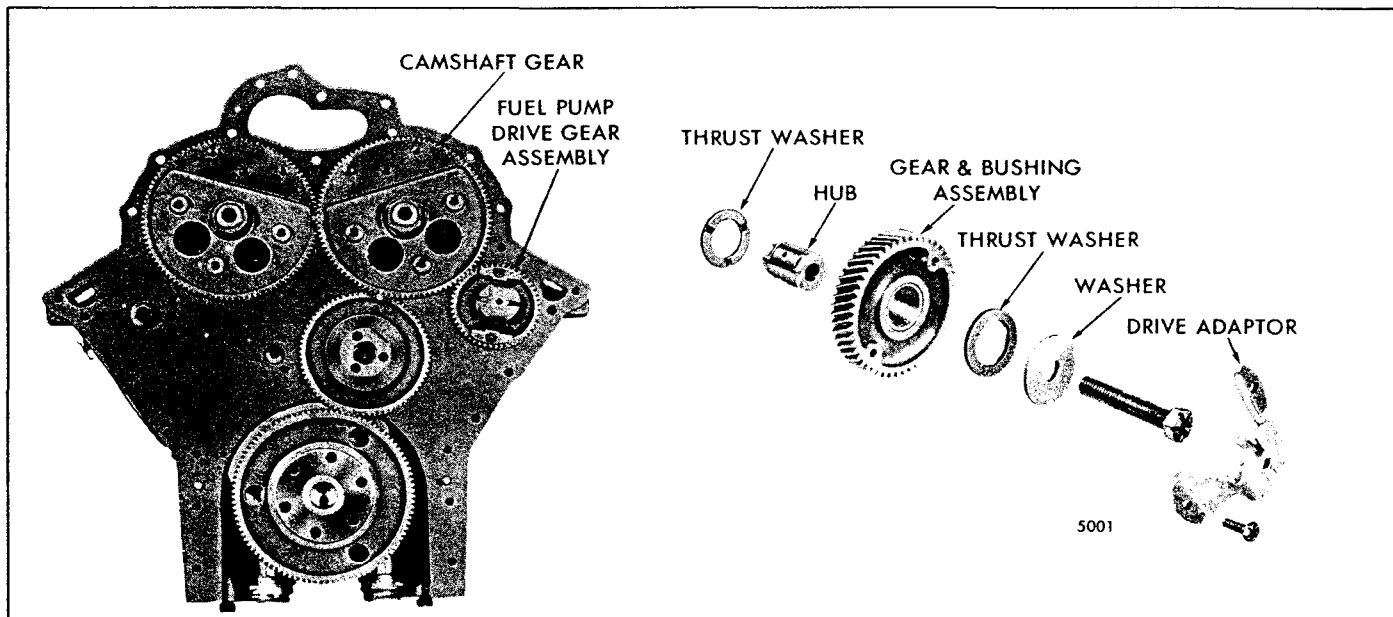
Typical Fuel Pump Drive Gear Mounting and Details (V-Type Engine)
